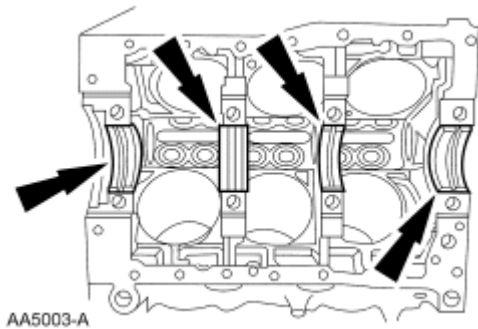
Identifying Crankshaft Upper Main Bearings And Upper Thrust Main Bearing
